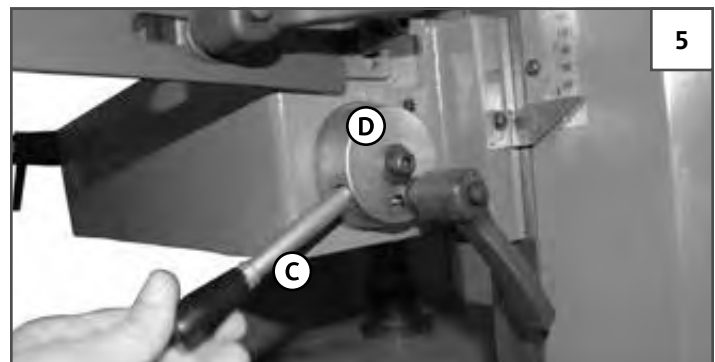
INSTALLING TABLE ROLLER ADJUSTMENT LEVER
